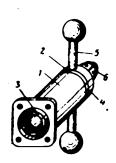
Puller for Removing Engine Manual Cranking Drive Spring and Bearing
